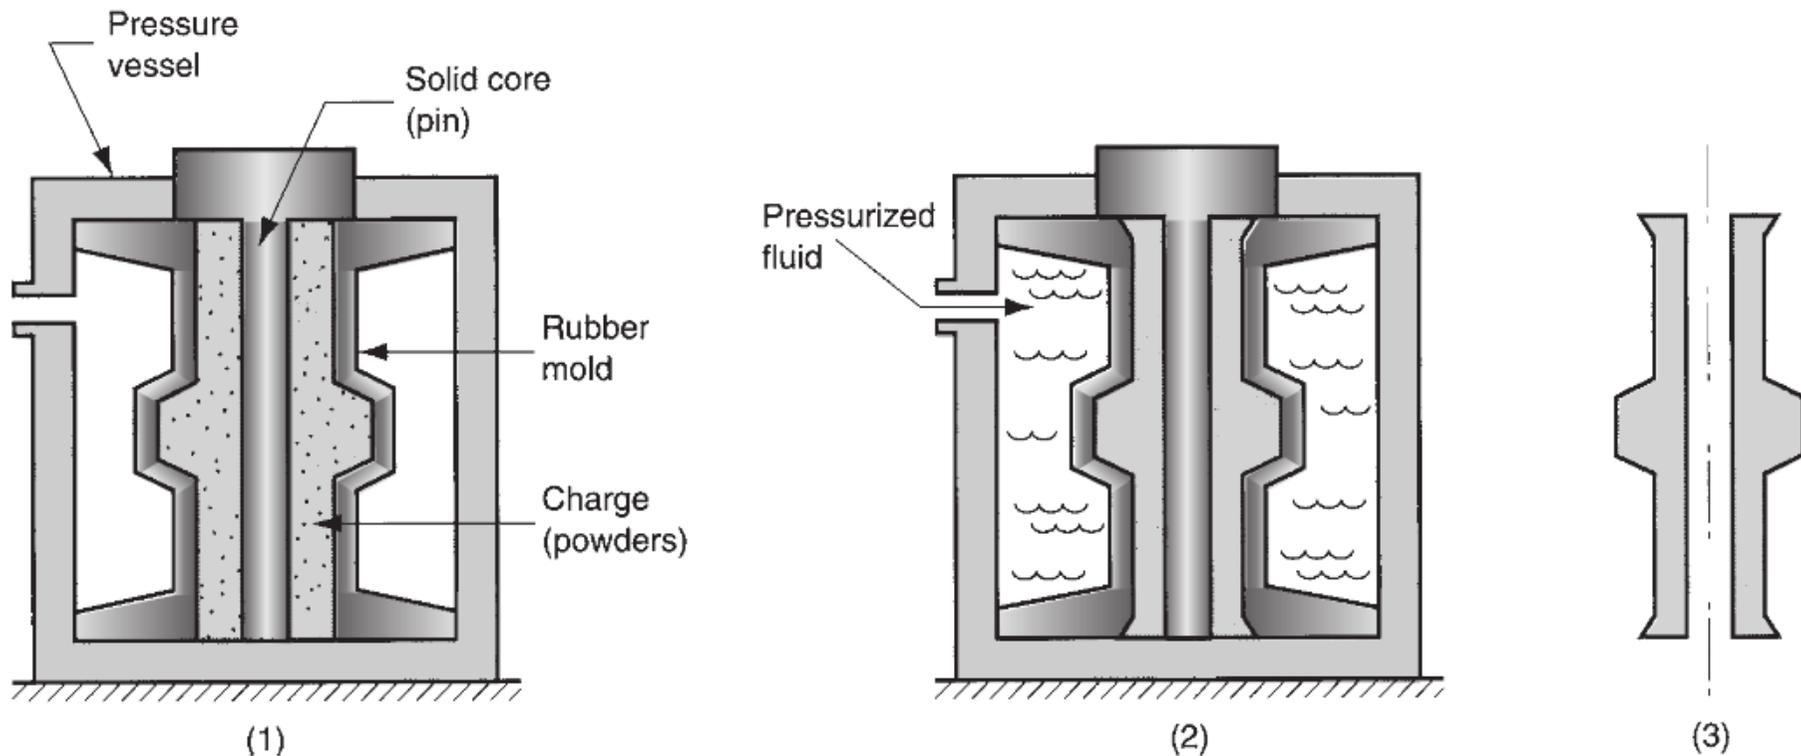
(a) Cold isostatic pressing: (1) powders are placed in the flexible mold; (2) hydrostatic pressure is applied against the mold to compact the powders; and (3) pressure is reduced, and the part is removed.
